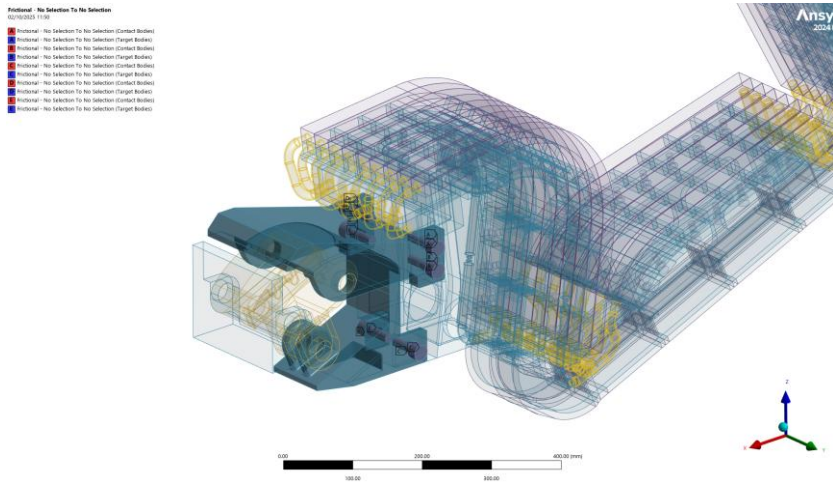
Frictional contacts between knuckle case connection screw heads and knuckle case
